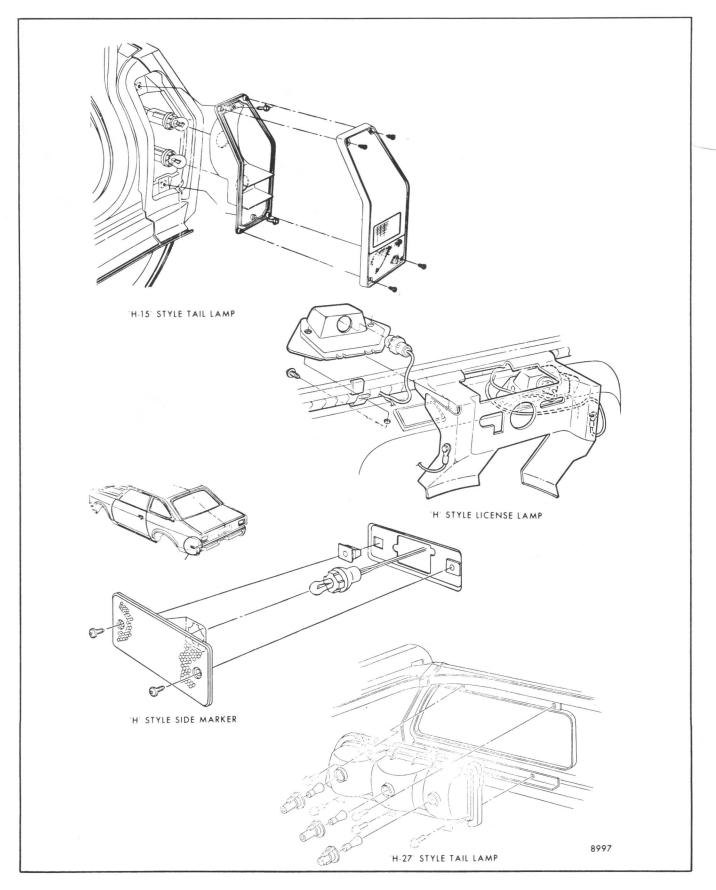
Exterior Lamp Installation - Pontiac Styles
